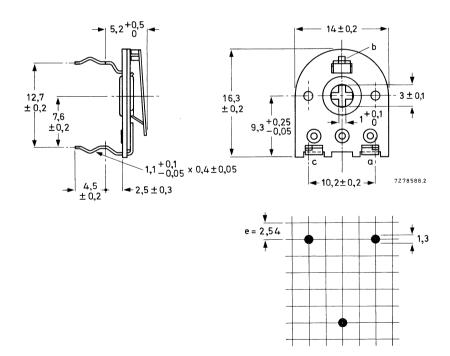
Potentiometer for horizontal mounting, with snap-in printed-wiring pins, 2322 409 033...
